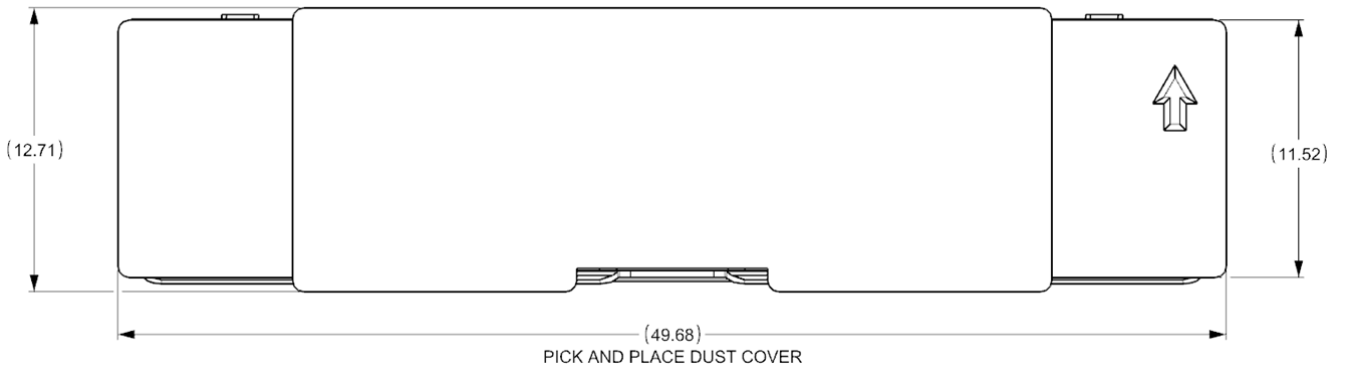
124-Pin Top View of Fixed-Side Connector with Dust Cover
